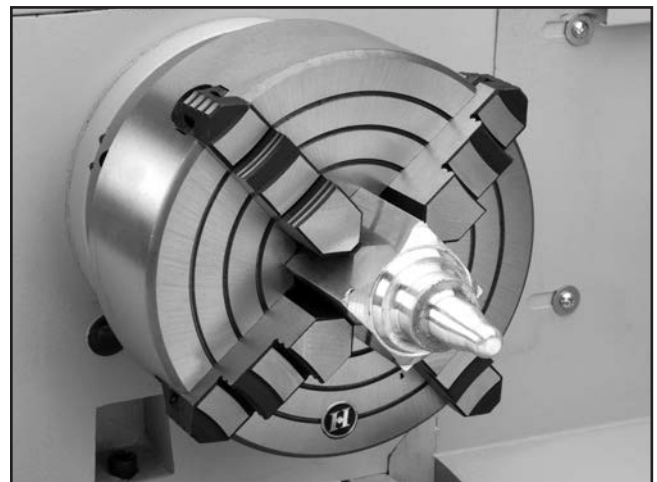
Example of non-cylindrical workpiece mounted in 4-jaw chuck.
